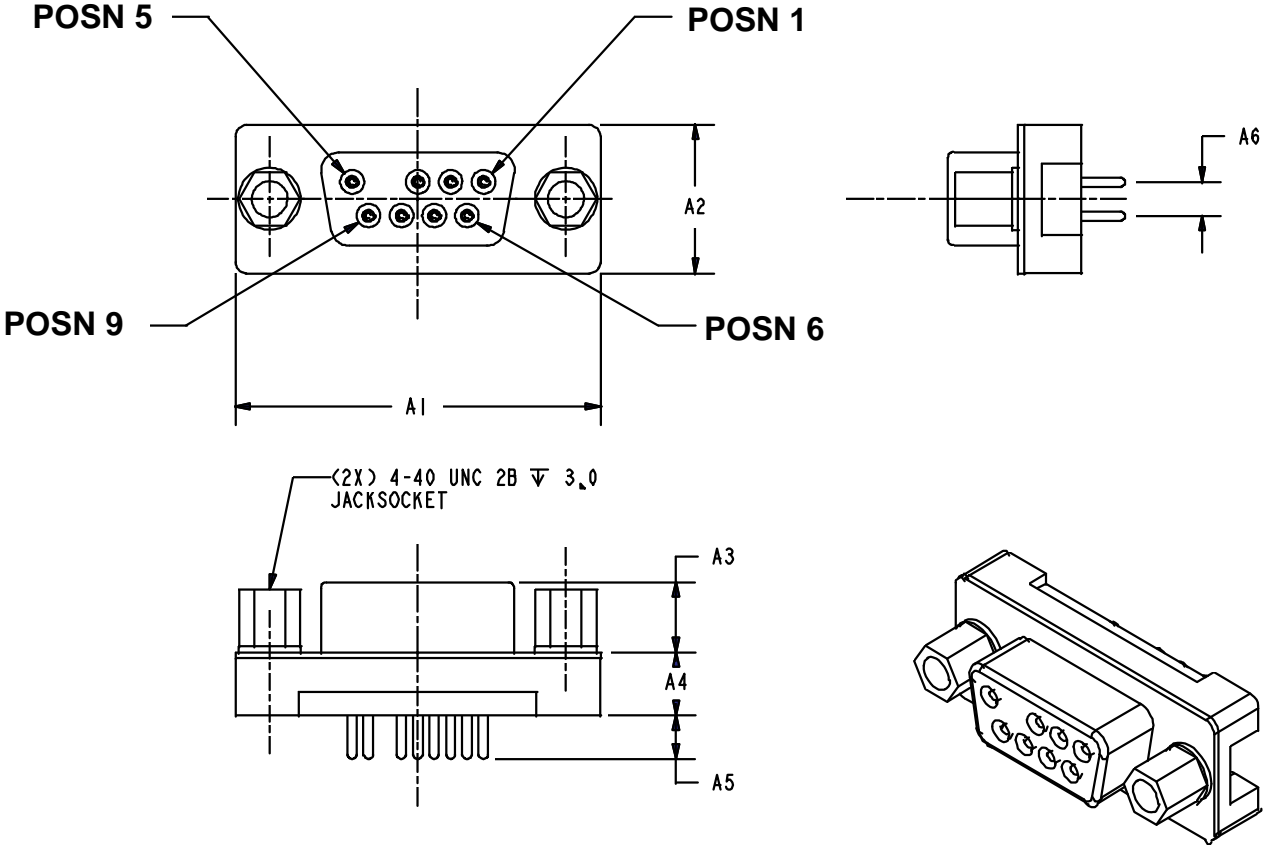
Fixed board straight through hole (version 1) overview and outline dimensions
